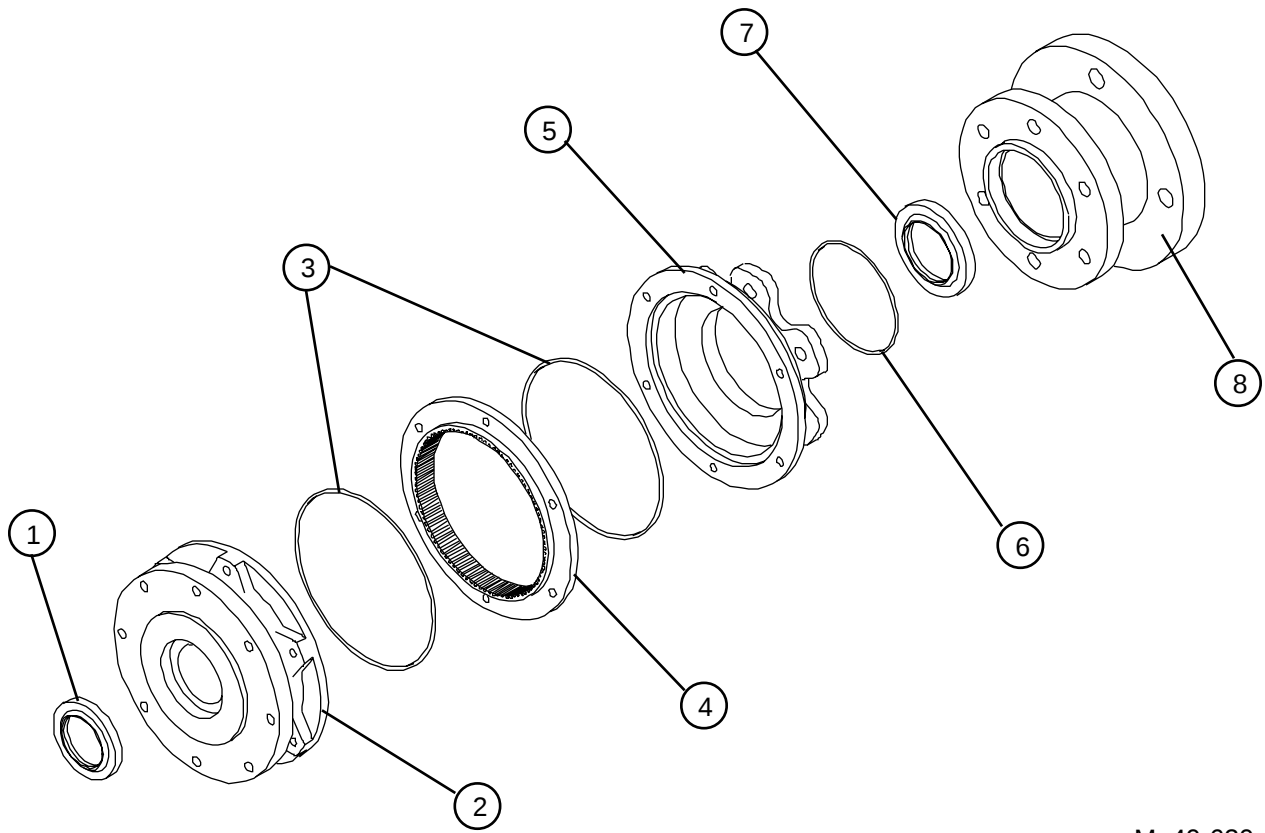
DRIVE AXLE ASSEMBLY (Standard 4x2)
